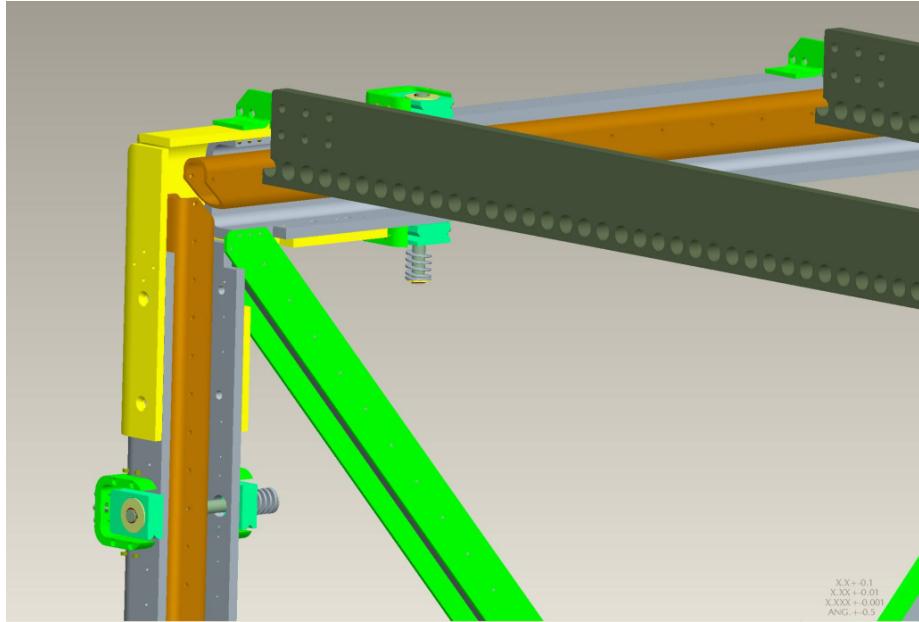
Rendering of the anode frame assembly. The C-channel is depicted in gray, and the adjustable tensioning bar assembly is shown in orange.
